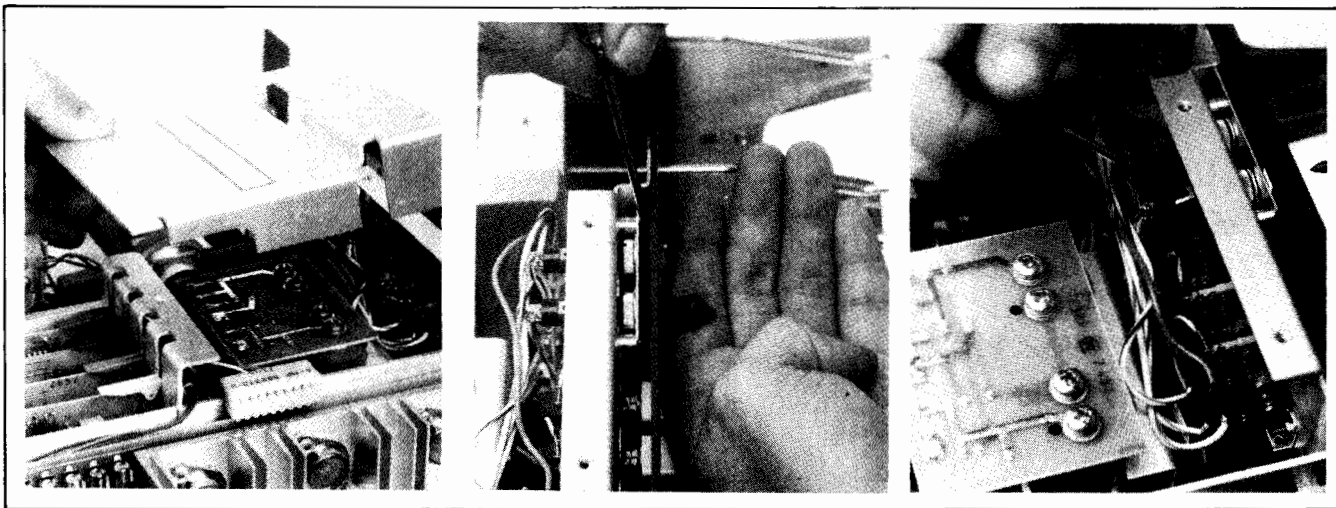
Lamp Plate/Front Panel Lamp Removal/Replacement
